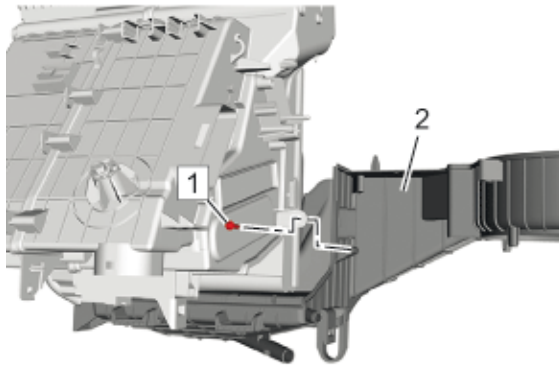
Air Conditioning Evaporator Lower Case And Bolt
